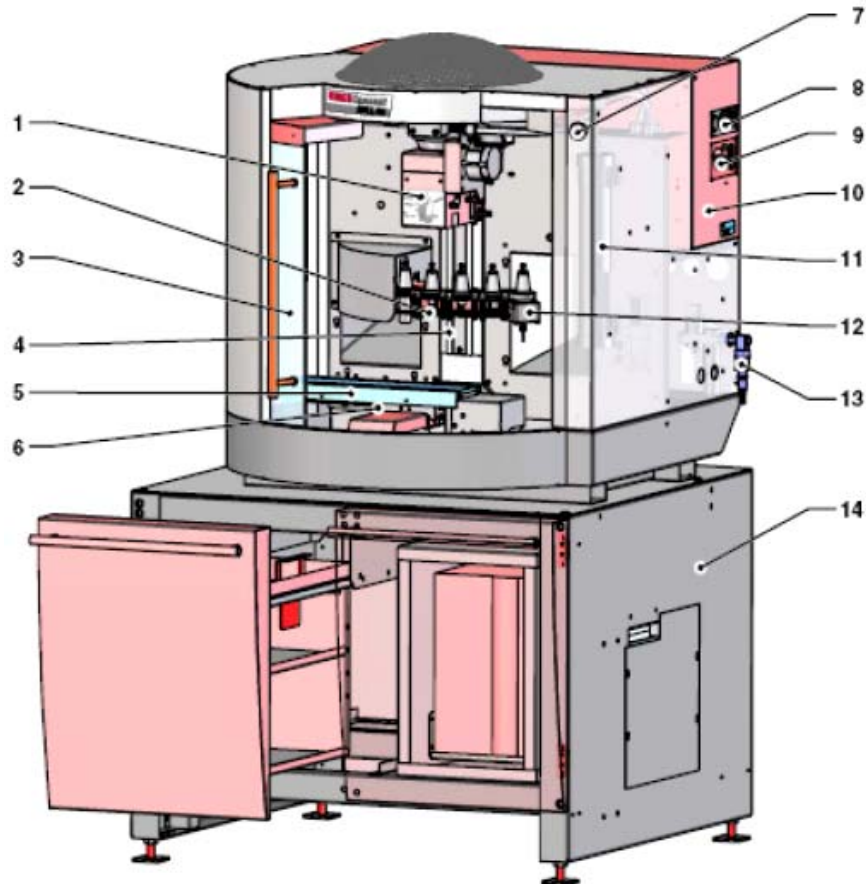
Parts of the EMCO mill 55 CNC machine.
